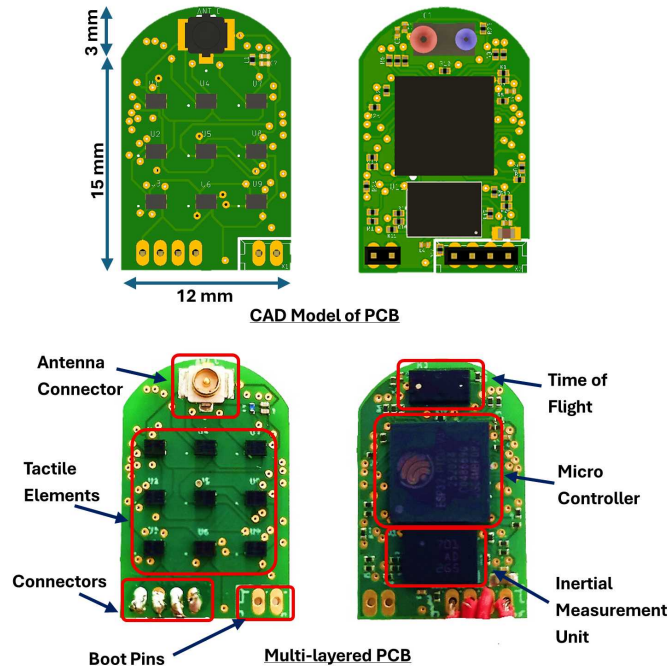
Multi-layered PCB with Front View on Left Side and Bottom View on Right Side
